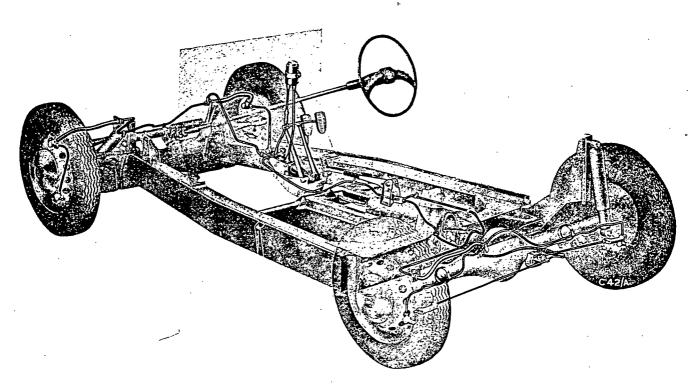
Braking system (Type 404 car) tandem master cylinder
